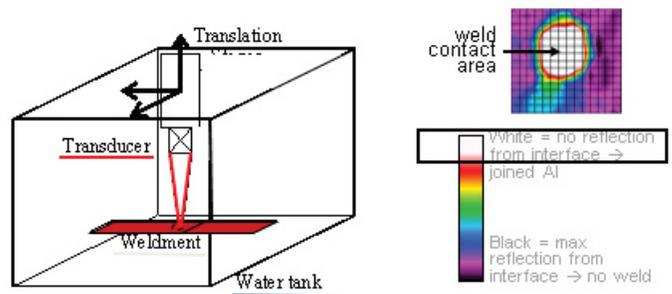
C-Scan Sensing of US Metal Welds
